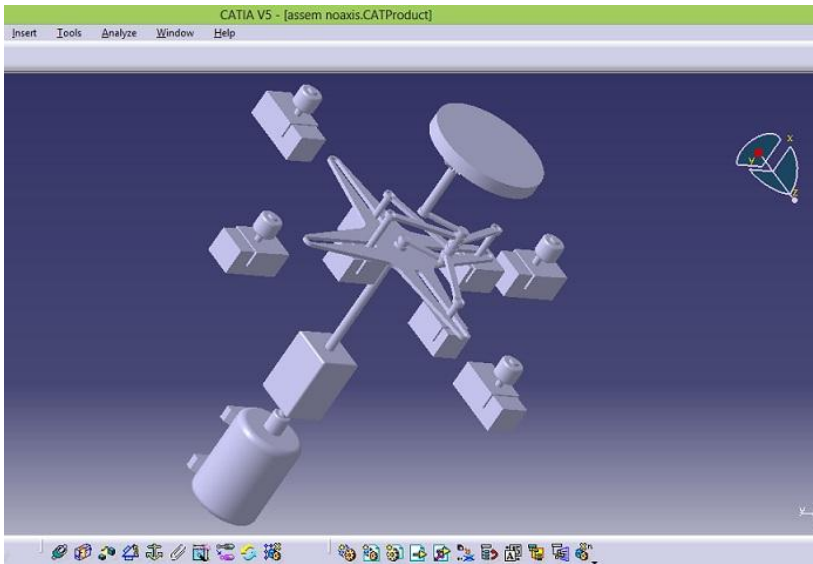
CATIA 3-D Isometric view of Principal components assembly.
